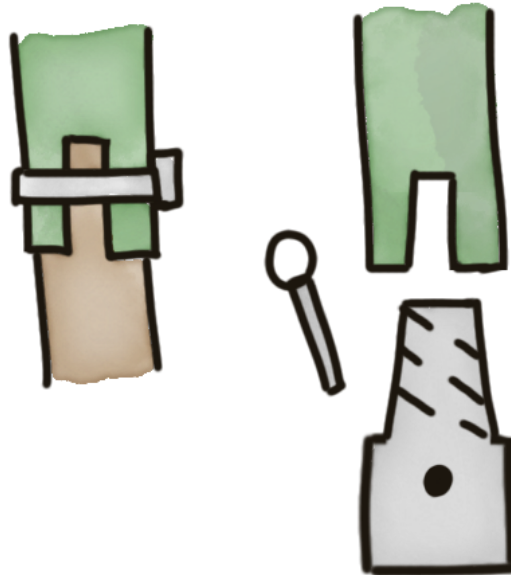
Keychain tongue assembly method (left) vs backpack strap friction tongue assembly method (right).
